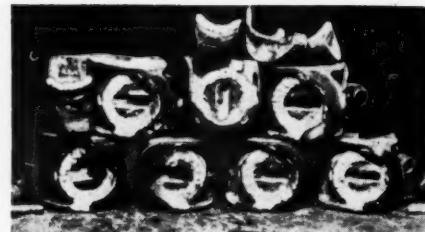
Drilling-machine post saddles and cones after surfacing and before machining.
